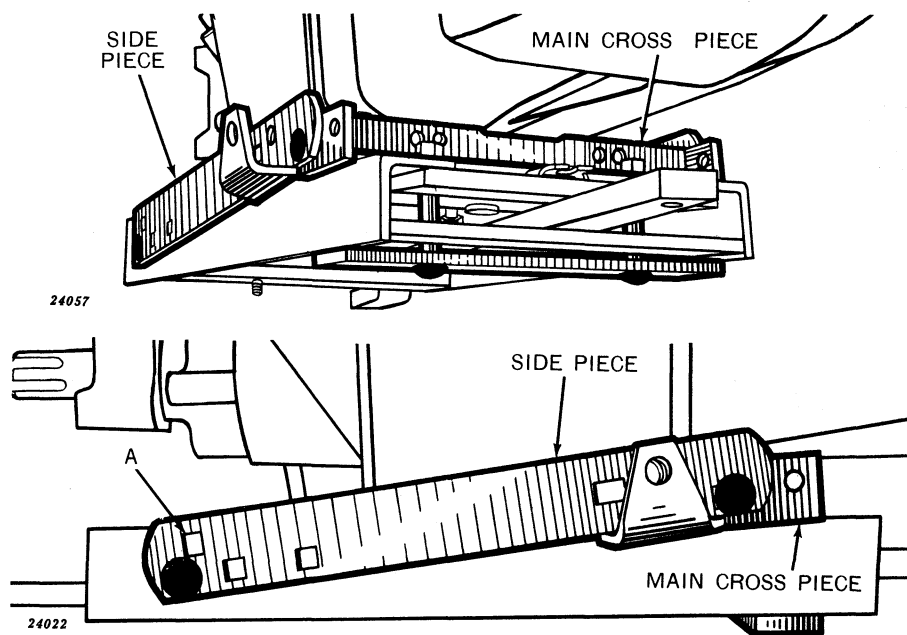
Draft Link Bracket Installed on Model "G" Tractors
